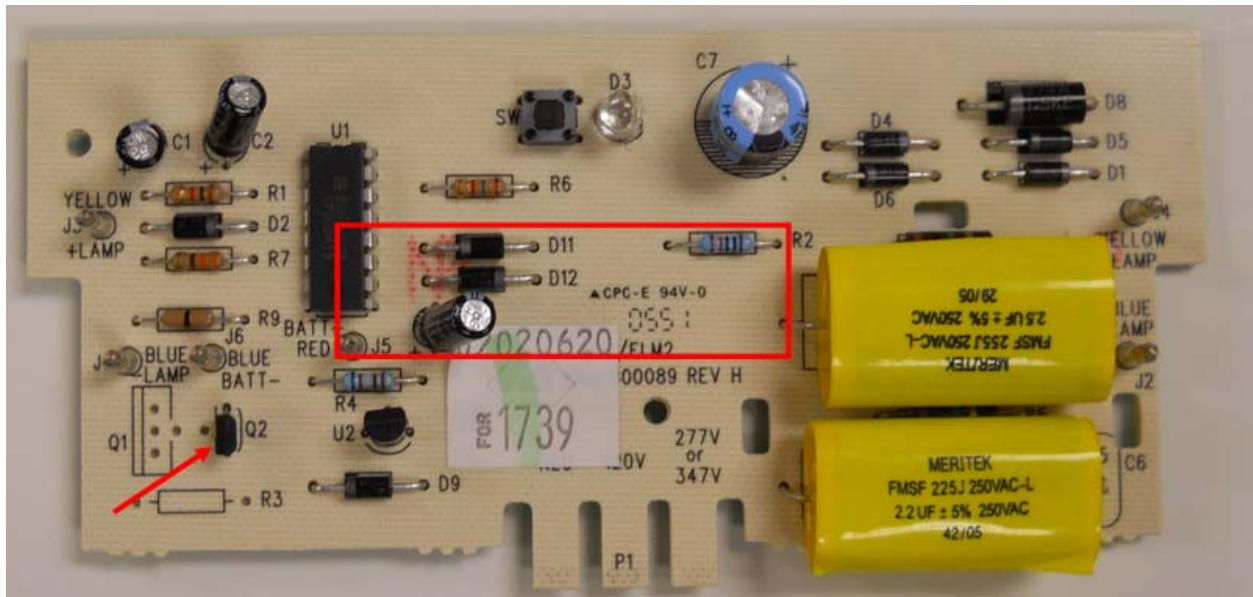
The circuit board shown is from a typical egress lighting unit. The parts of the circuit that are involved in detecting power failure are outlined in red, and the arrow points to the transistor that connects the lamps to the battery. This type of circuit is unique to battery-backup type applications, and draws no more than 0.025 W when the lamps are off.
